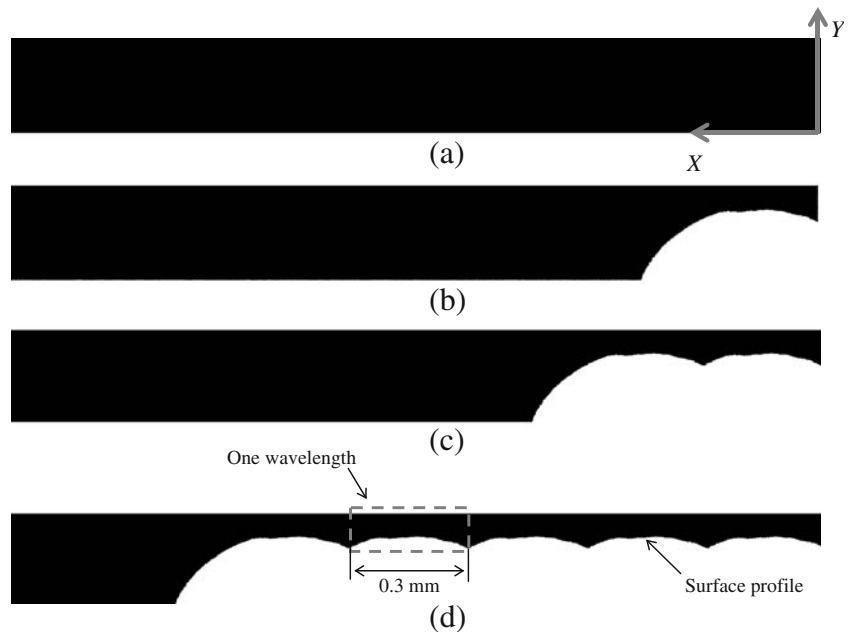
2-D schematic shape of workpiece produced on a lathe
